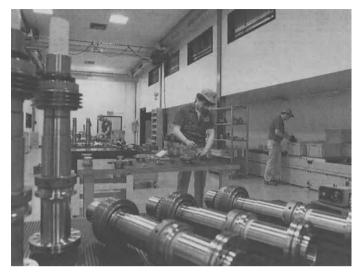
The clean room and sub-assembly area for critical parts, such as spindles and headstocks (turning centres), also spindle cartridges (machining centres) prior to complete machine tool assembly. [Courtesy of Yamazaki Mazak Ltd.]
